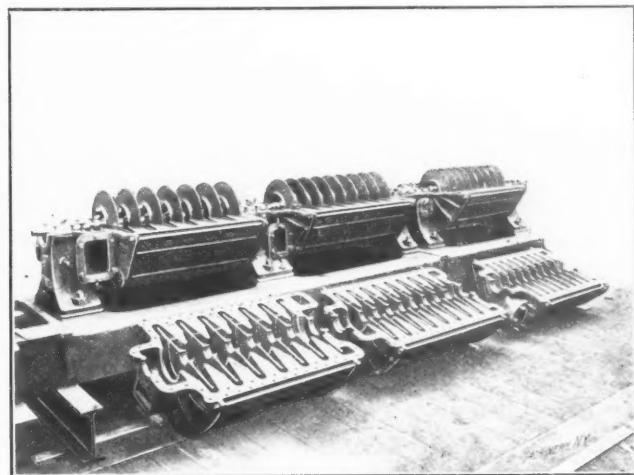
Rateau Turbo-compressor built by Brown, Boveri & Co., to be driven by Gas Turbine.
